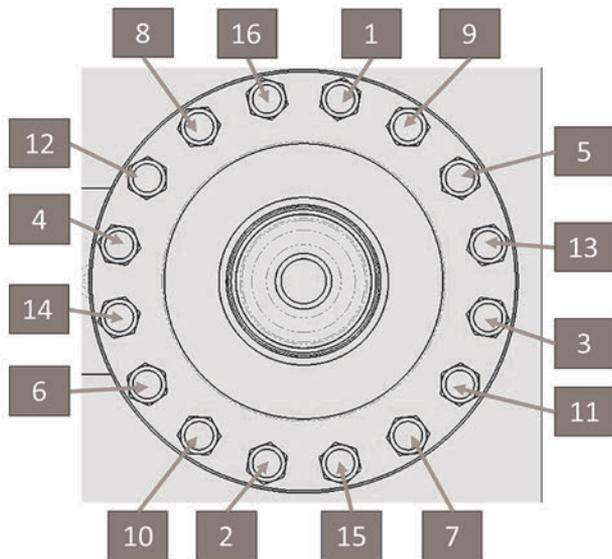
Torque Sequence Single Bolting Circle 16 Bolts
